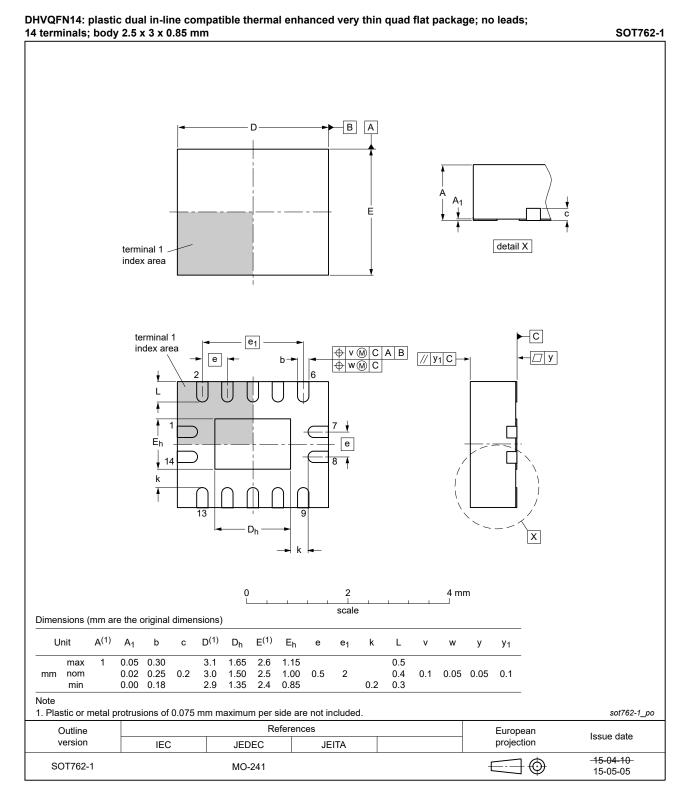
Package outline SOT762-1 (DHVQFN14)
